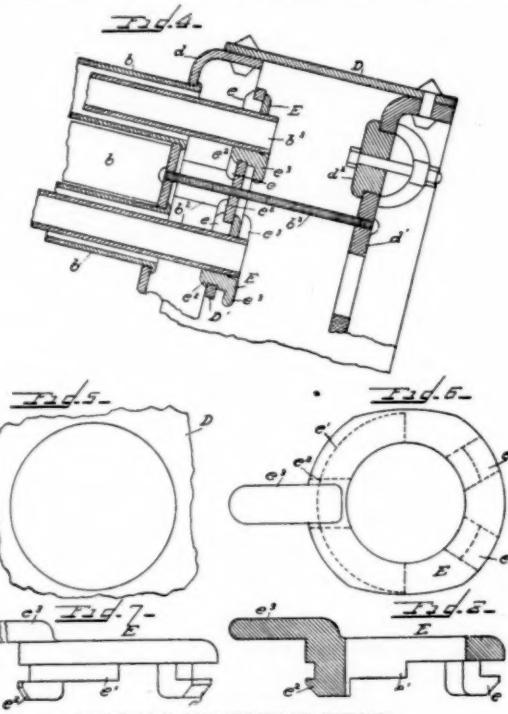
HAMMOND WATER-TUBE BOILER.
